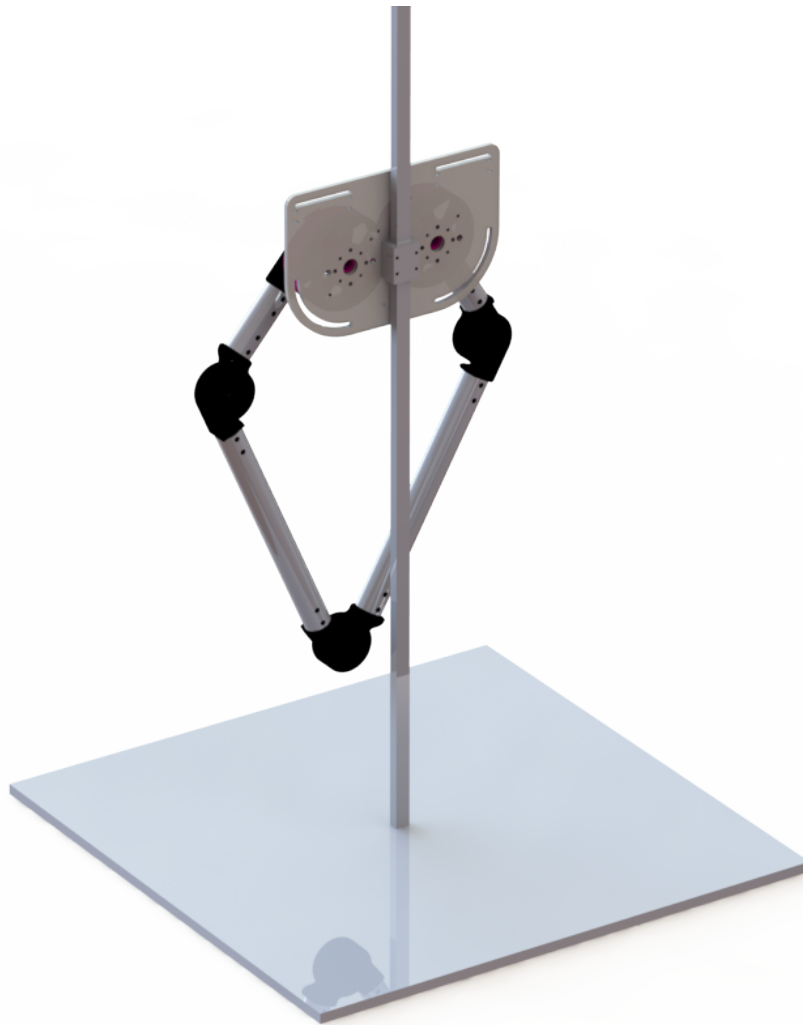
Linear guide mounted leg model (CAD Solidworks assembly).
